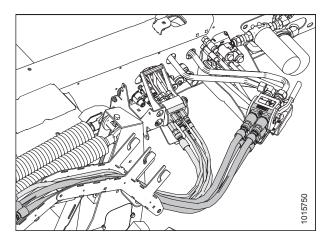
Hydraulic Multicouplers and Hose Routing
